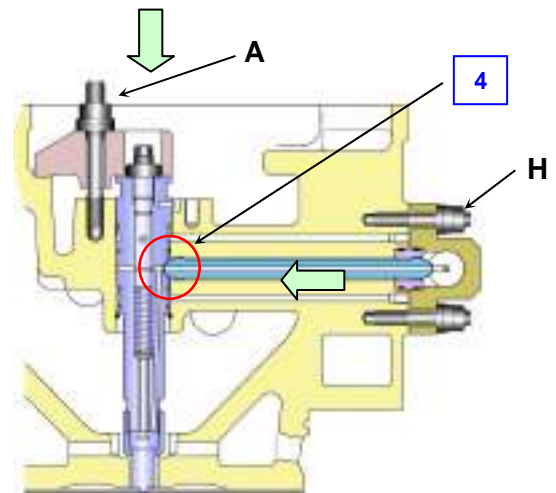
Mounting of Fuel injection valve(연료 분사 밸브 조립)
